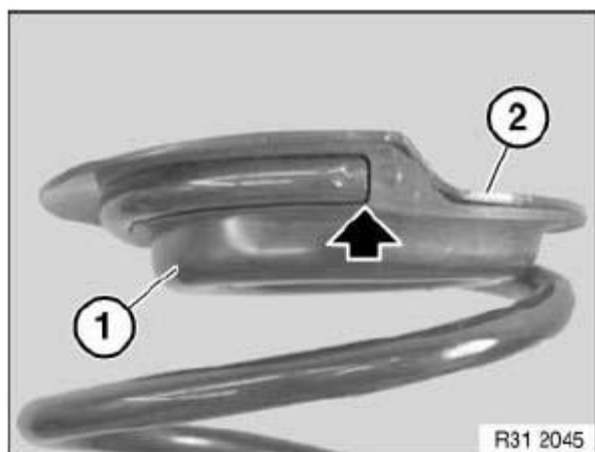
Identifying Spring Plate And Upper Spring Pad
